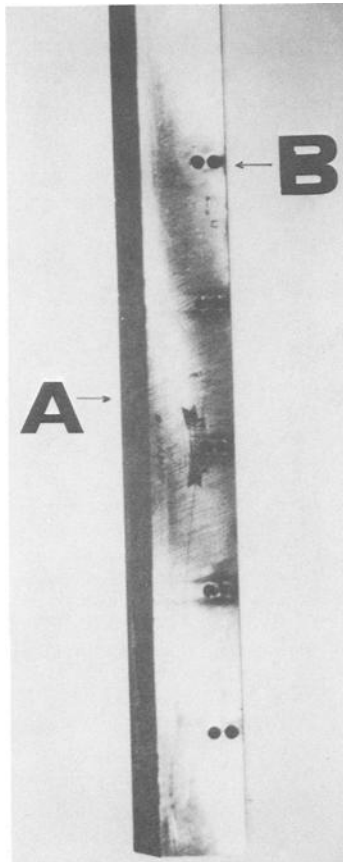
Overall perspective of 904-mm (37-in.) Challenge paper cutter blade (A = cutting edge, B = mounting holes).
